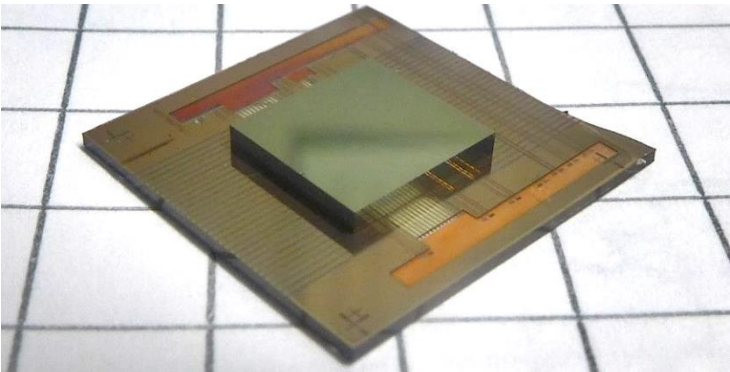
Macroscopic picture of the PIC25G assembled with the electrical and optical glass interposer
